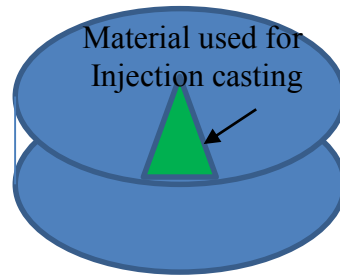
Sketch of MgZnCa ingots with a diameter of 22mm and 15mm height showing where the material for injecting casting is taken from.
